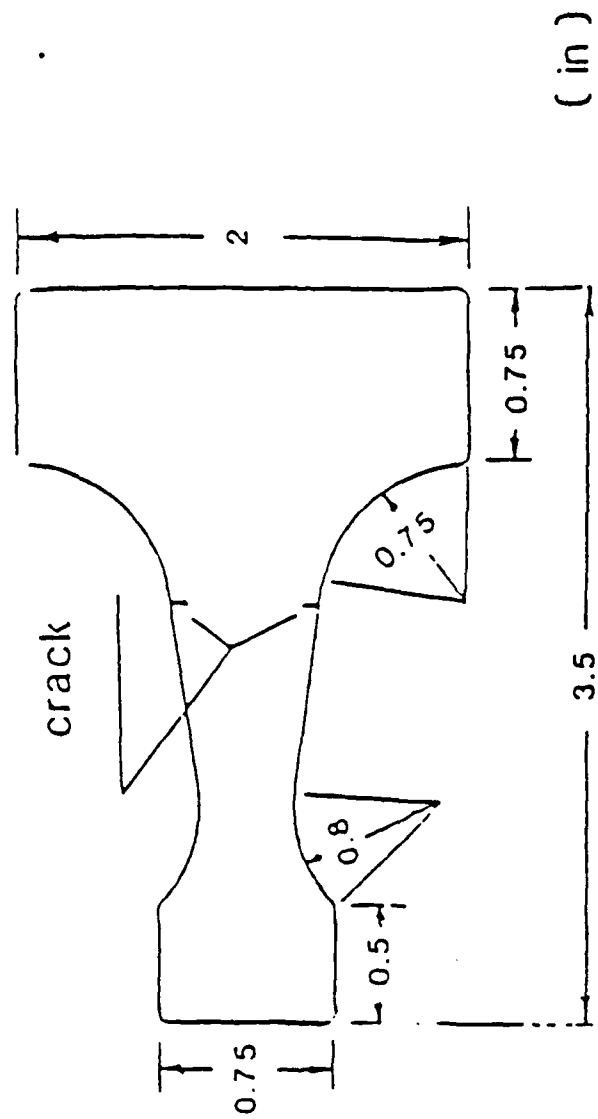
Fatigue specimen made of 1100-O aluminium with cracks.
